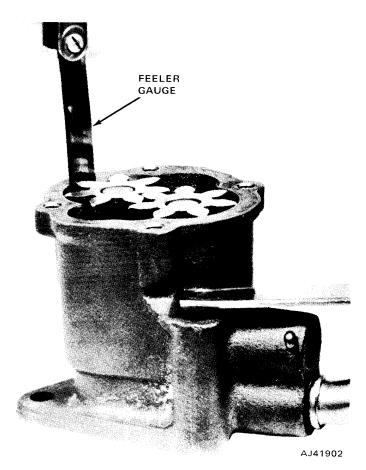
A-34 Oil Pump Gear-to-Body Clearance Measurement
